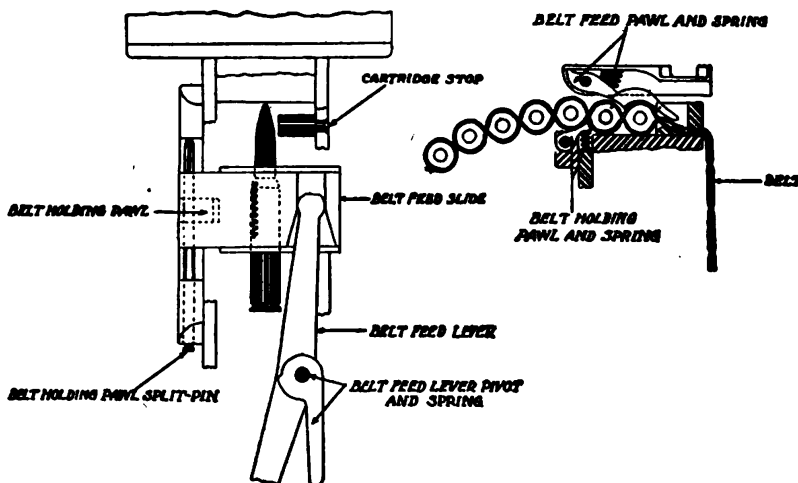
Belt feed mechanism, Browning caliber .30 machine gun.
